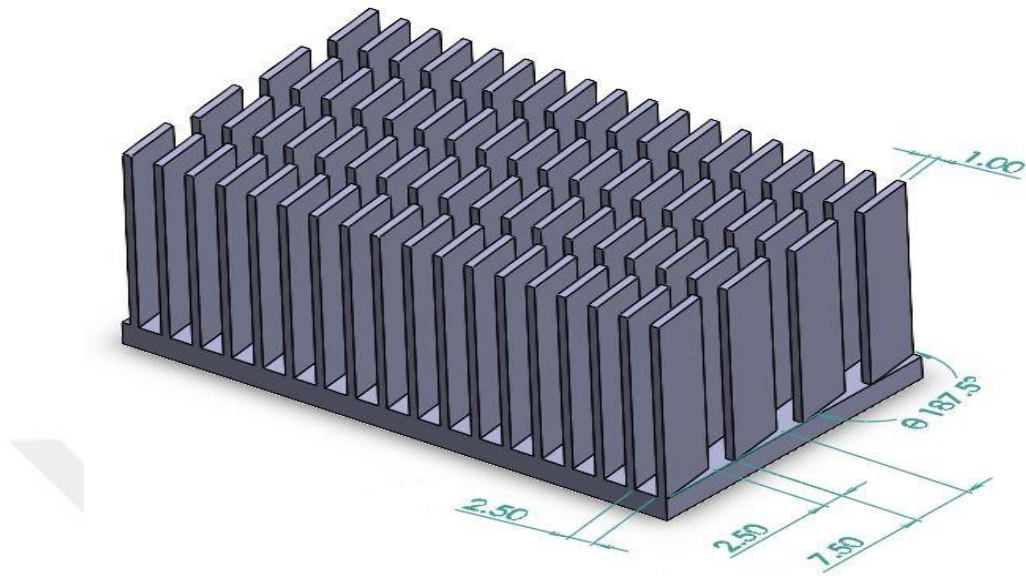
The CAD design of separated short angled plate fins heat sink
